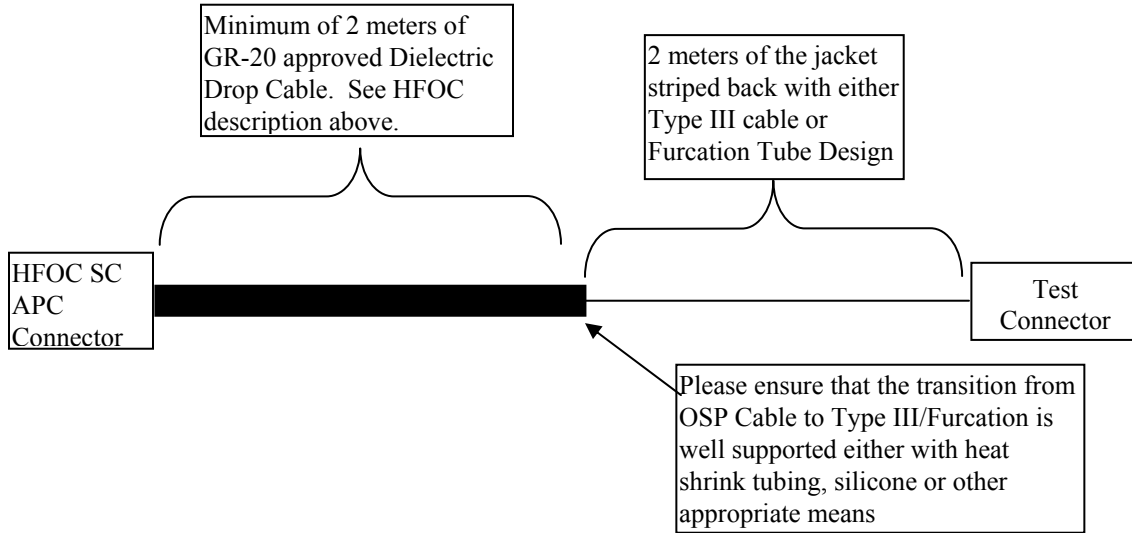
Required Configuration of HFOC Jumper Cable Assemblies
